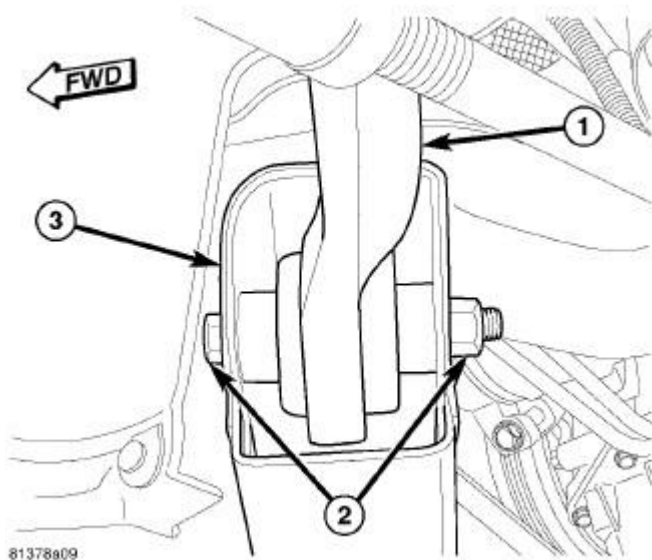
TENSION STRUT CRADLE BOLT/NUT
